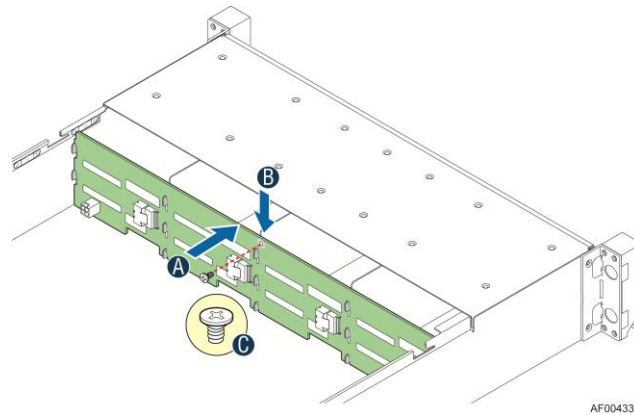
3.5" Hot-Swap Backplane and Drive Bay Assembly
